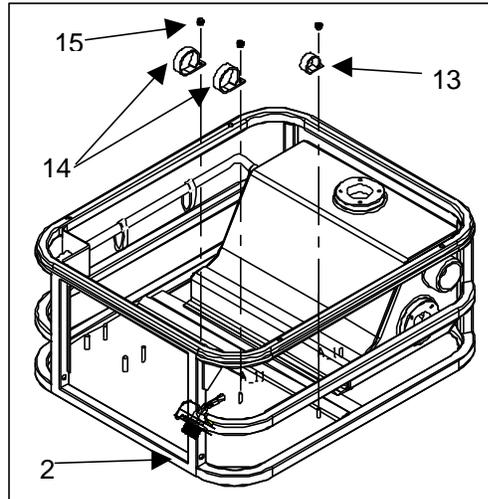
Frame, Connector Harness, and Controller Assemblies.
